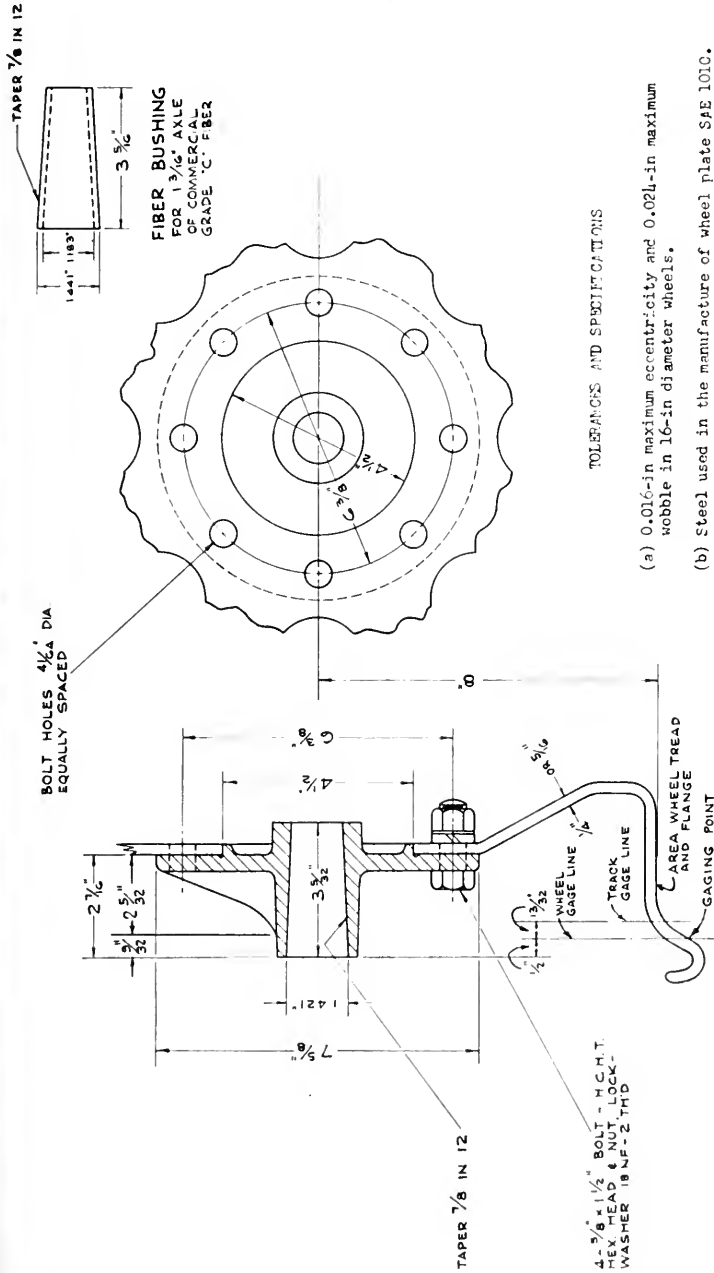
AREA 16-in bolted demountable-plate insulated wheel and bushing for motor cars, trailers and push cars using 1 3/8-in axles.
